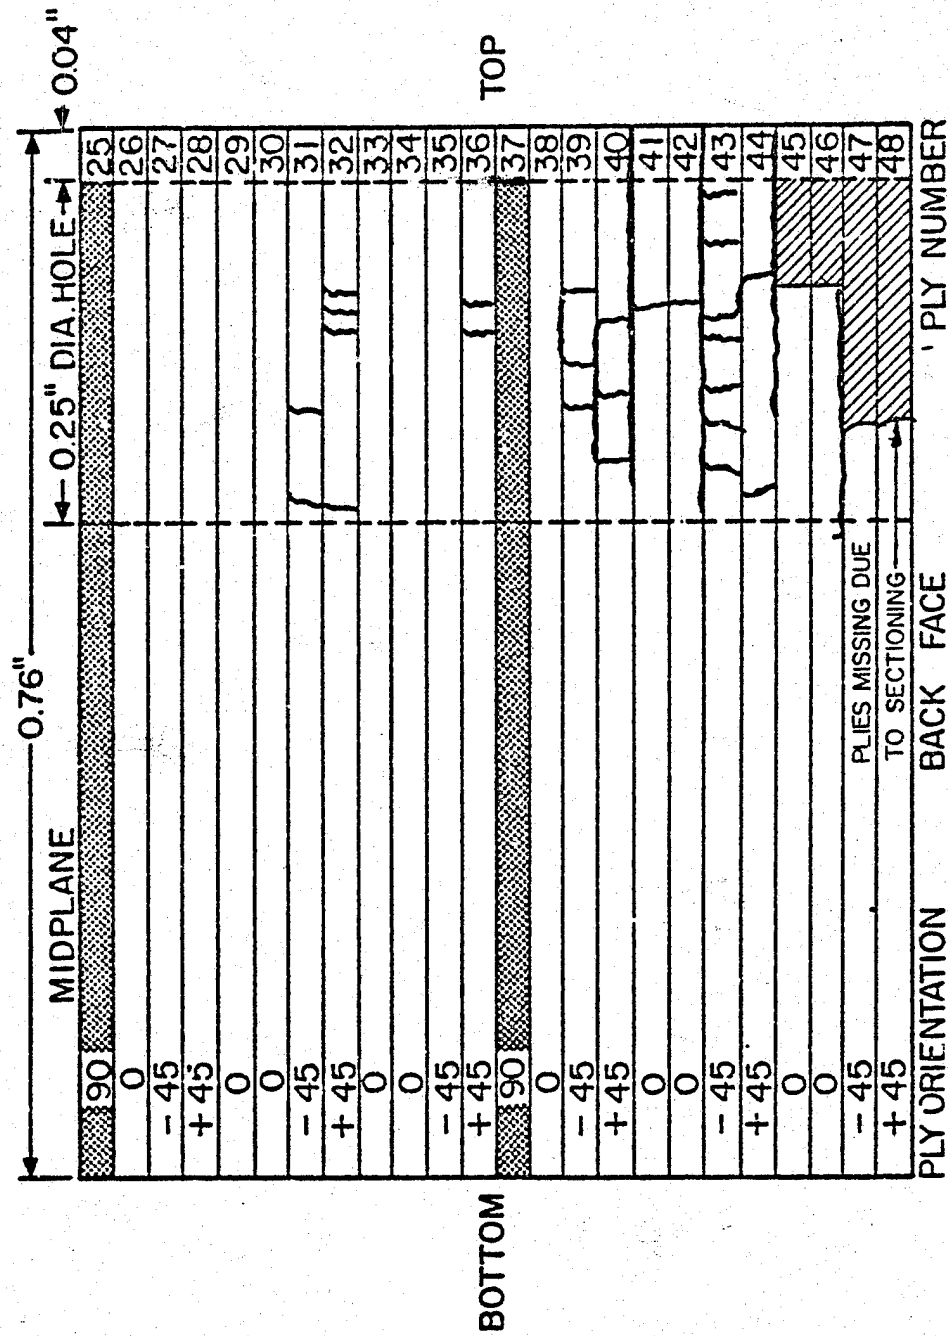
B.: The fourth longitudinal section of specimen 1-6 (47 ply) showing damage detail (90 deg. plies have been highlighted for viewing ease).
